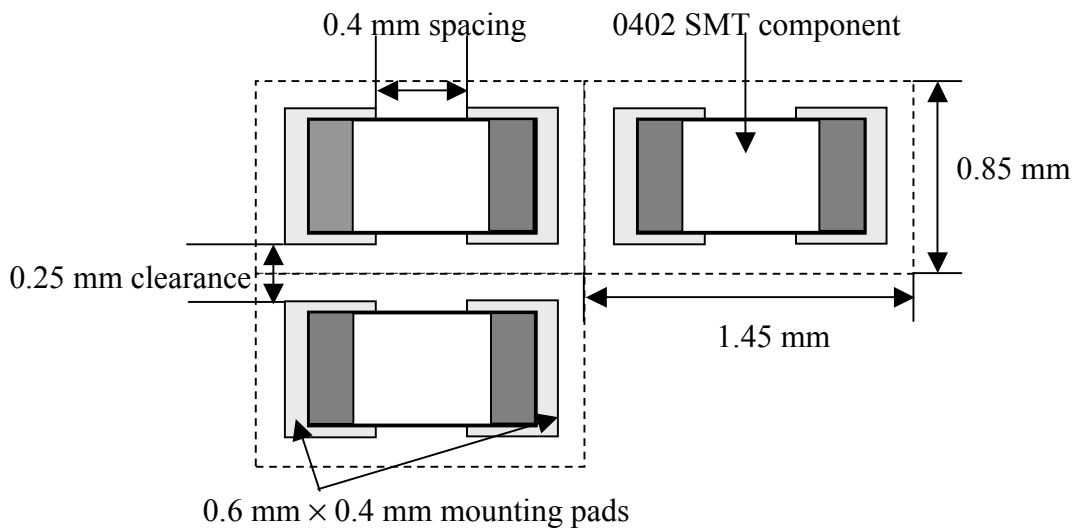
Clearance and mounting pads of 0402 SMT component.
